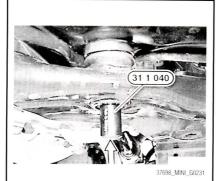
Screw special tool 31 1 040 onto joint. Strike joint from below to release it from taper in front axle carrier
